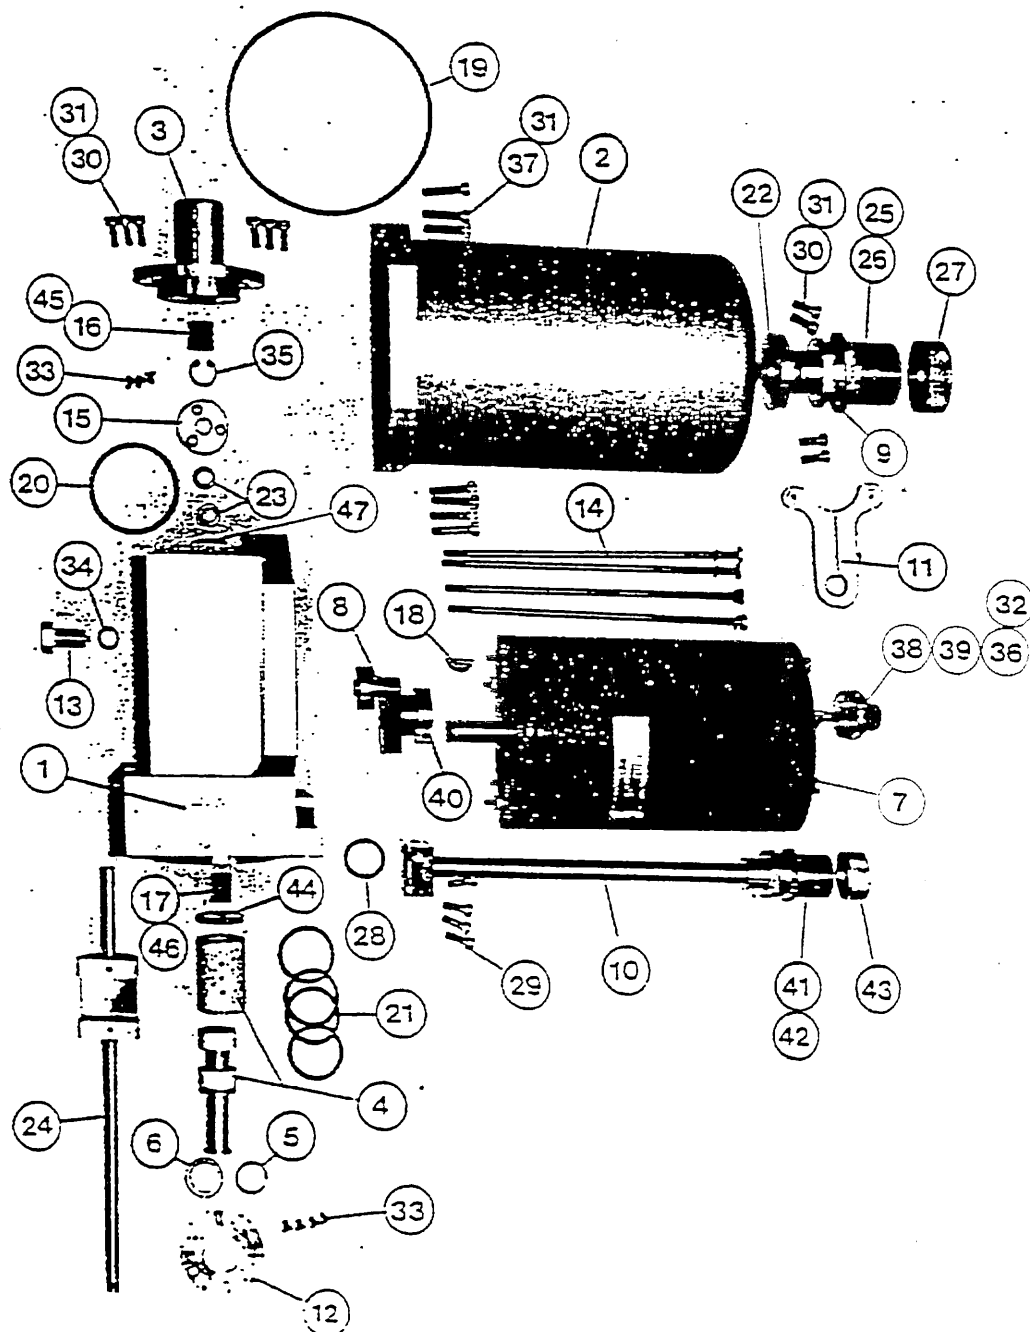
DRIVE UNIT ASSEMBLY (065)
